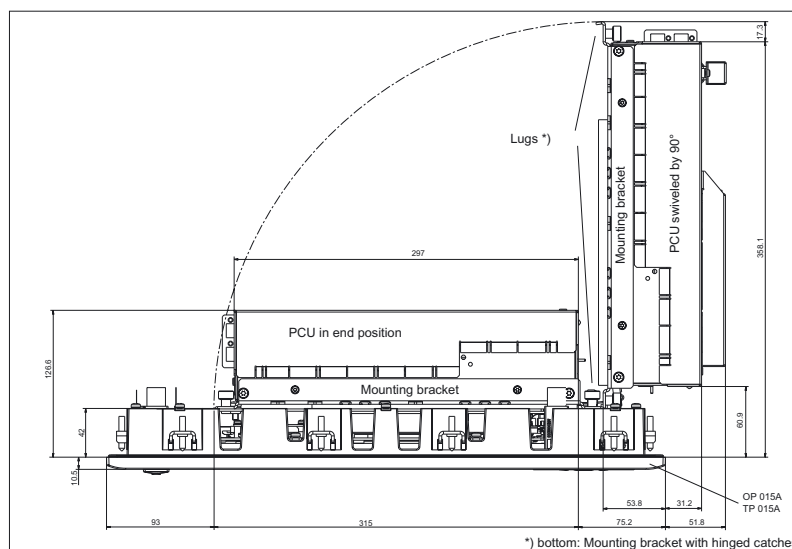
Mounting the PCU to the TP 015A operator panel front (as seen from above)
